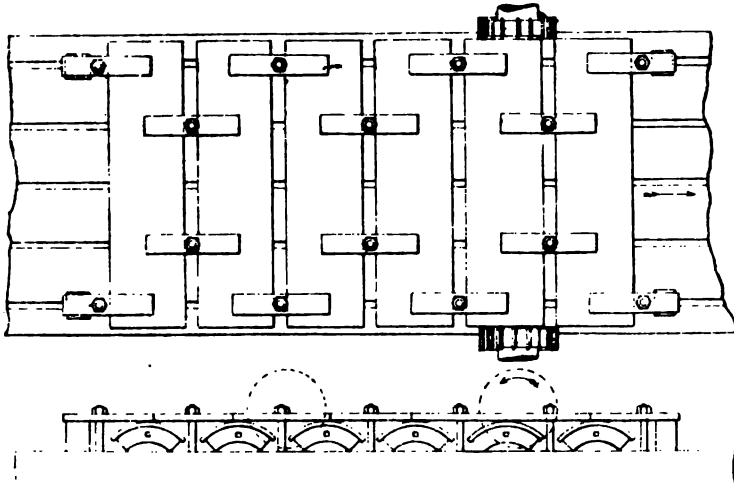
End Joints of Corner Tank Plates being tooled with End Mills while held down with Clamping Bolts and Plates.
